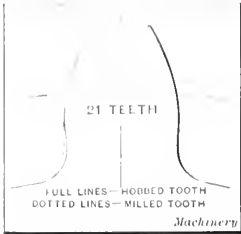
Comparison between Hobbed and Milled Gear Teeth
